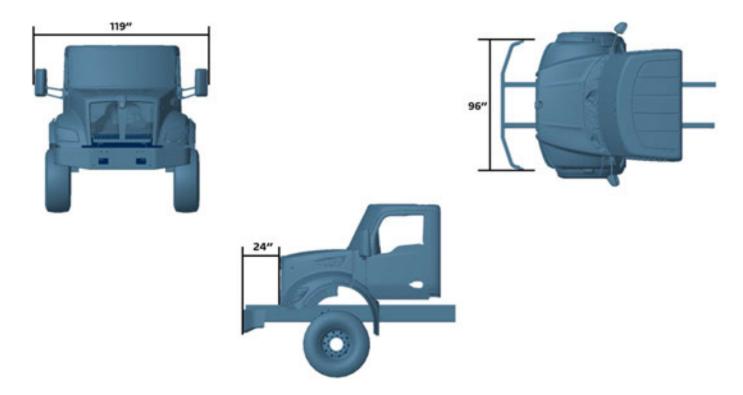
VH 24" FEPTO Extension Top, Front & LH View - Overall Dimensions
